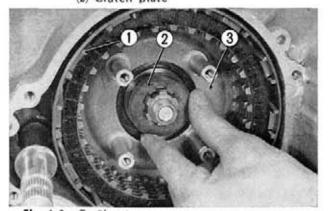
① Clutch outer ② 25 mm spline washer ③ Clutch pressur plate
